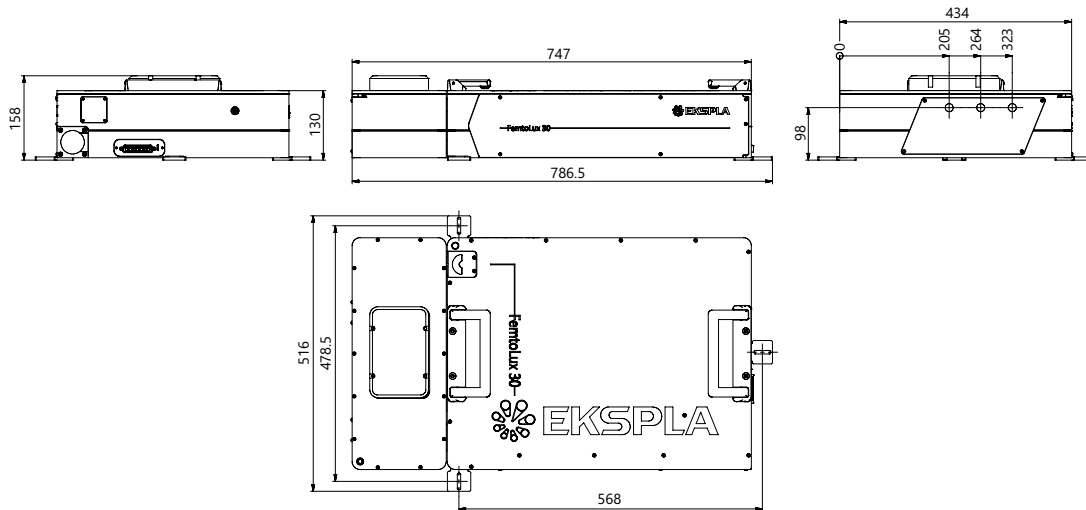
FemtoLux 30 with harmonics module. Laser head outline drawing
